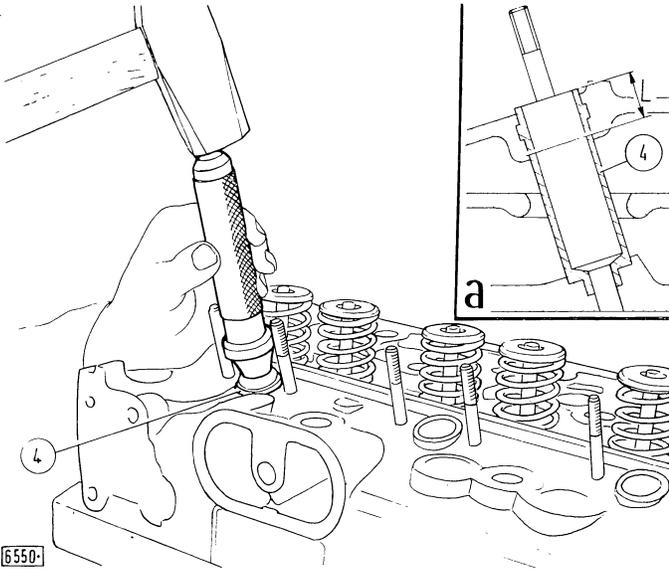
Expanding the Fuel Injector Sleeves in Position Using Punch Part No. 291350
